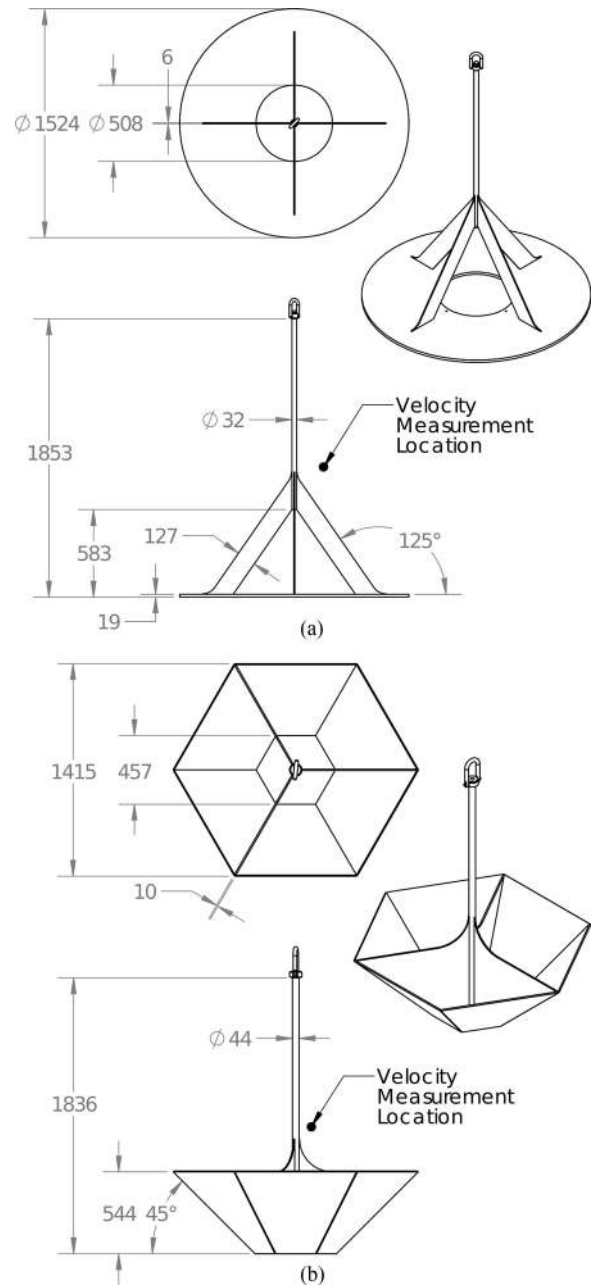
Heave plates tested using the miniWEC: (a) flat plate and (b) hexagonal conic. Both heave plates were tested with their lower holes open and closed. All dimensions are in units of centimeter.
